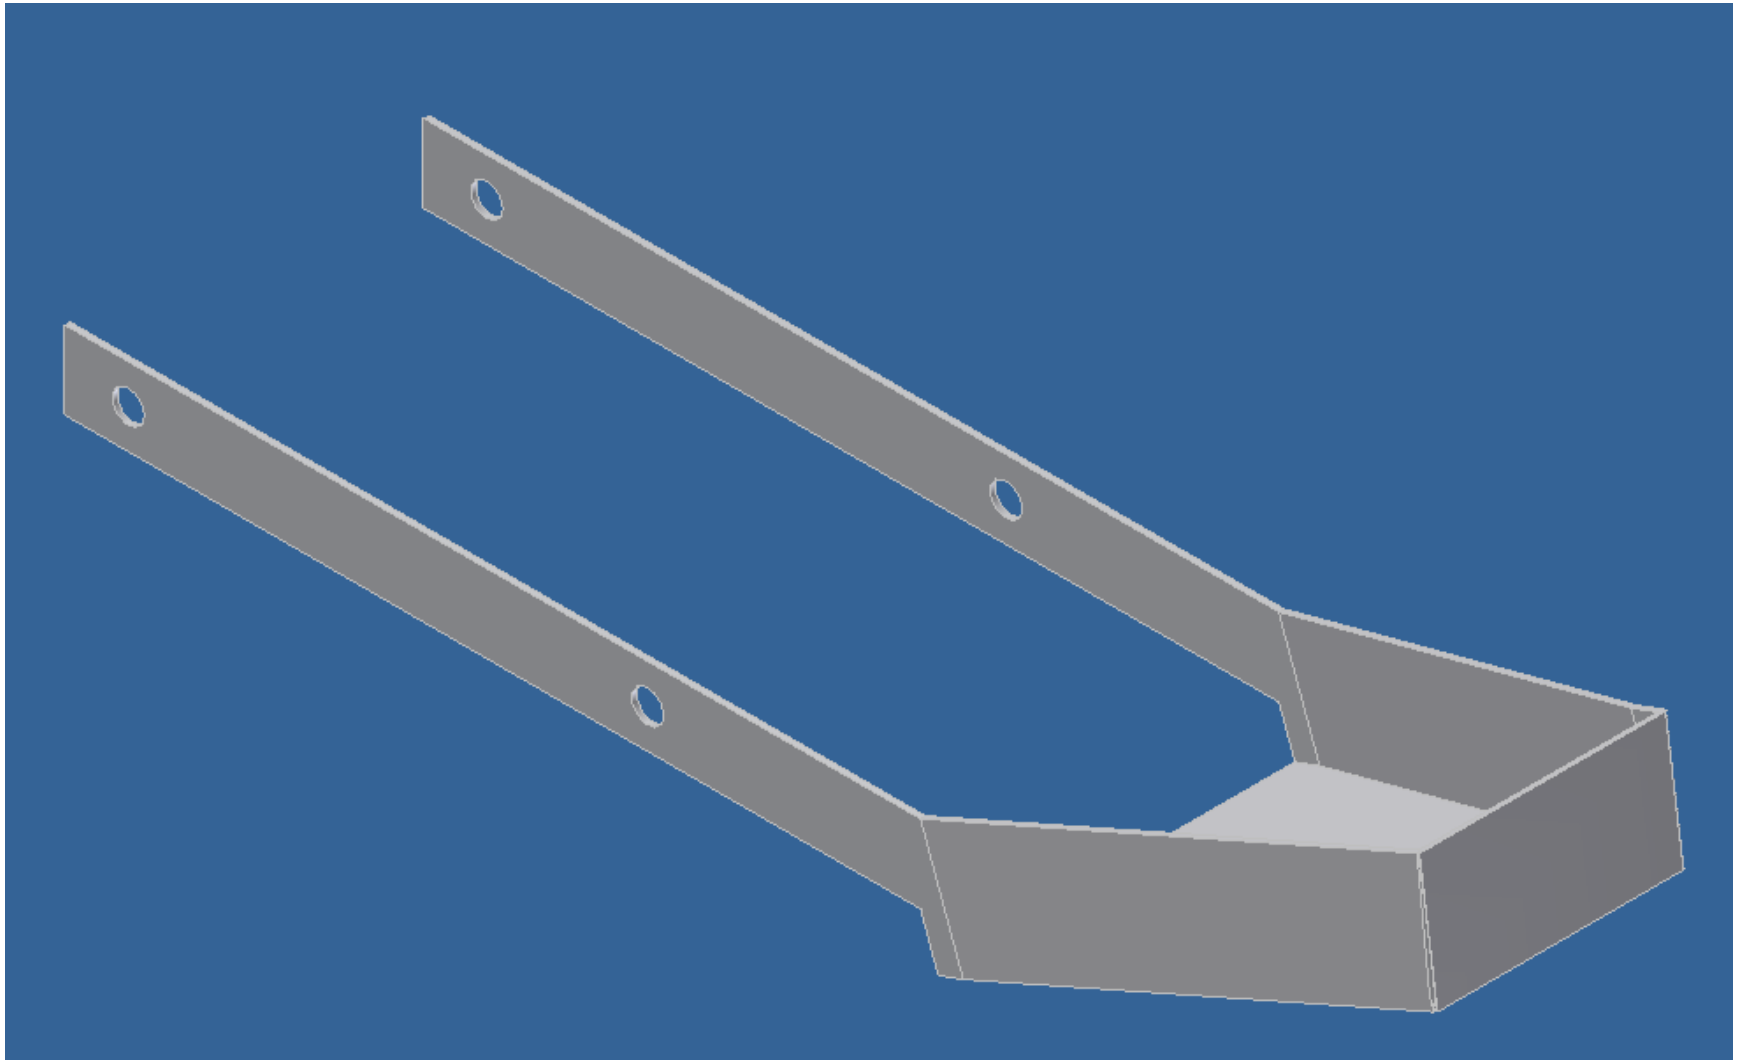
A: Pictorial view of the Straight-Spike Floating Weeder assembly
